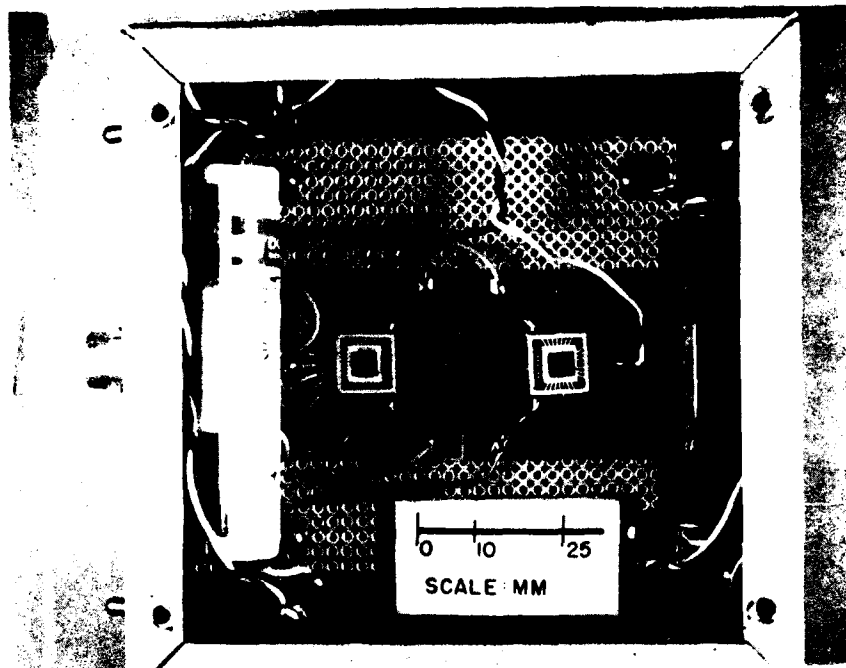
DOUBLE CHIP TEST CIRCUIT IN ALUMINUM CHASSIS, TOP VIEW
